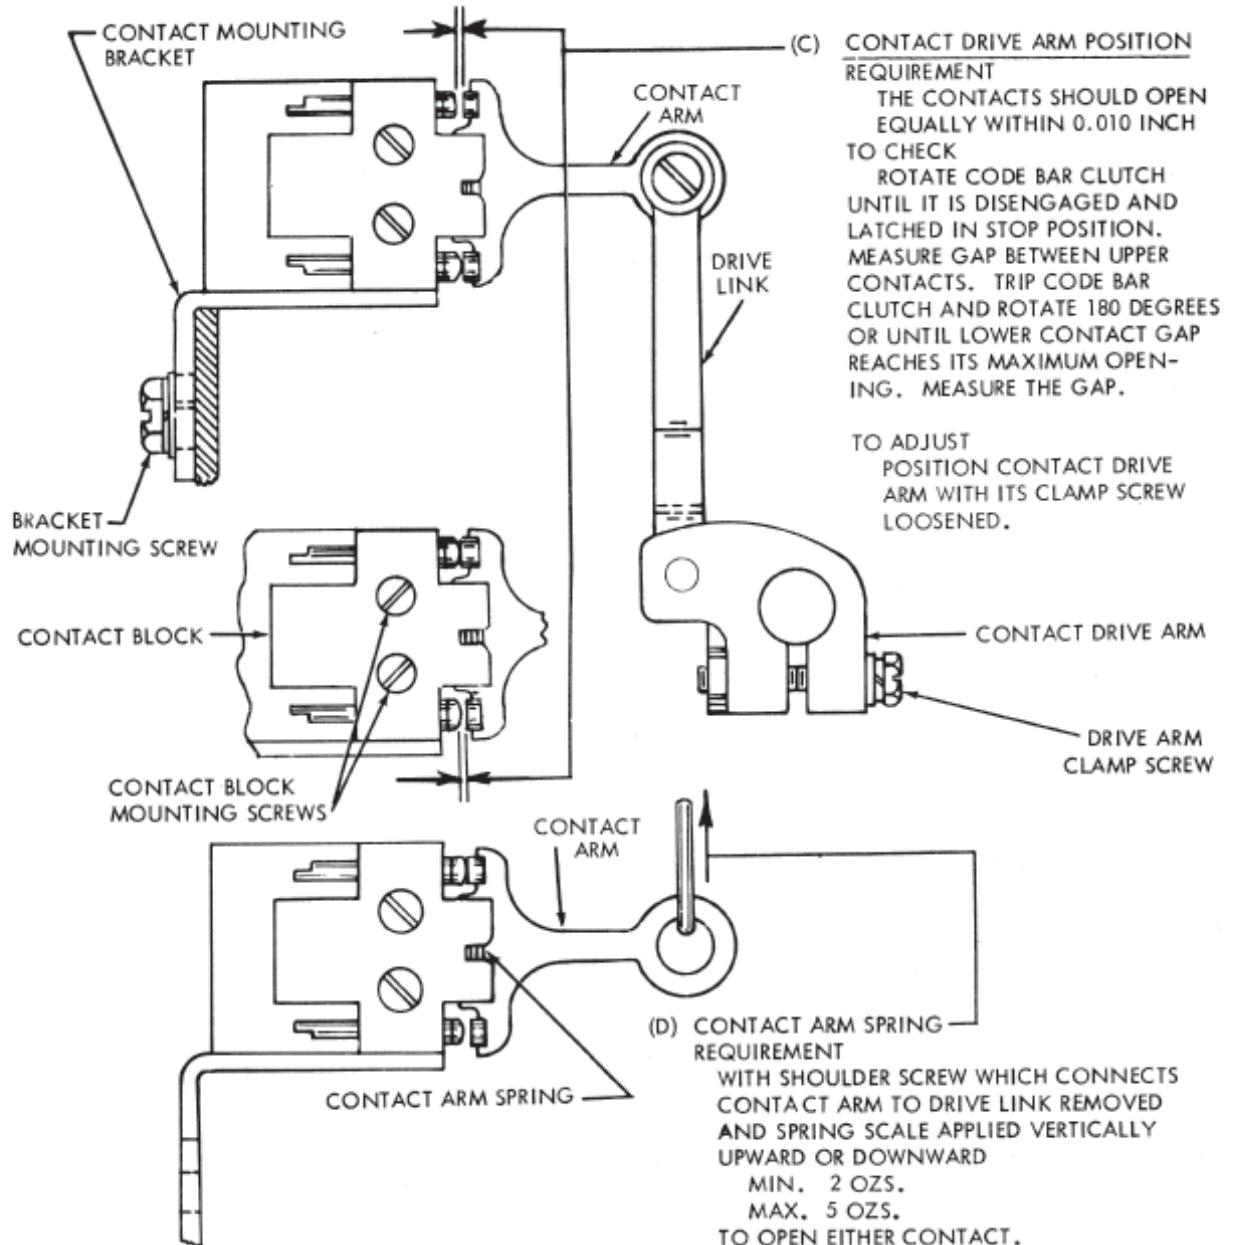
TYPING UNIT, UNIVERSAL CONTACT (SELECTOR)
